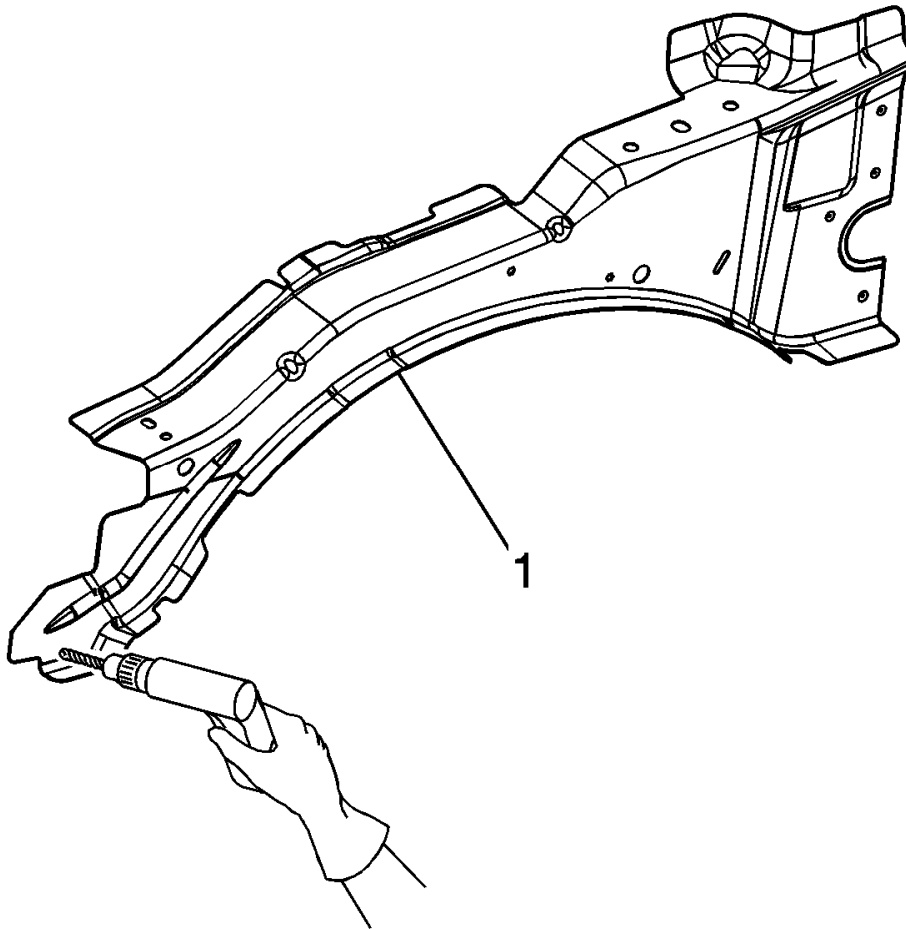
Drilling Plug Weld Holes In Replacement Upper Rail
